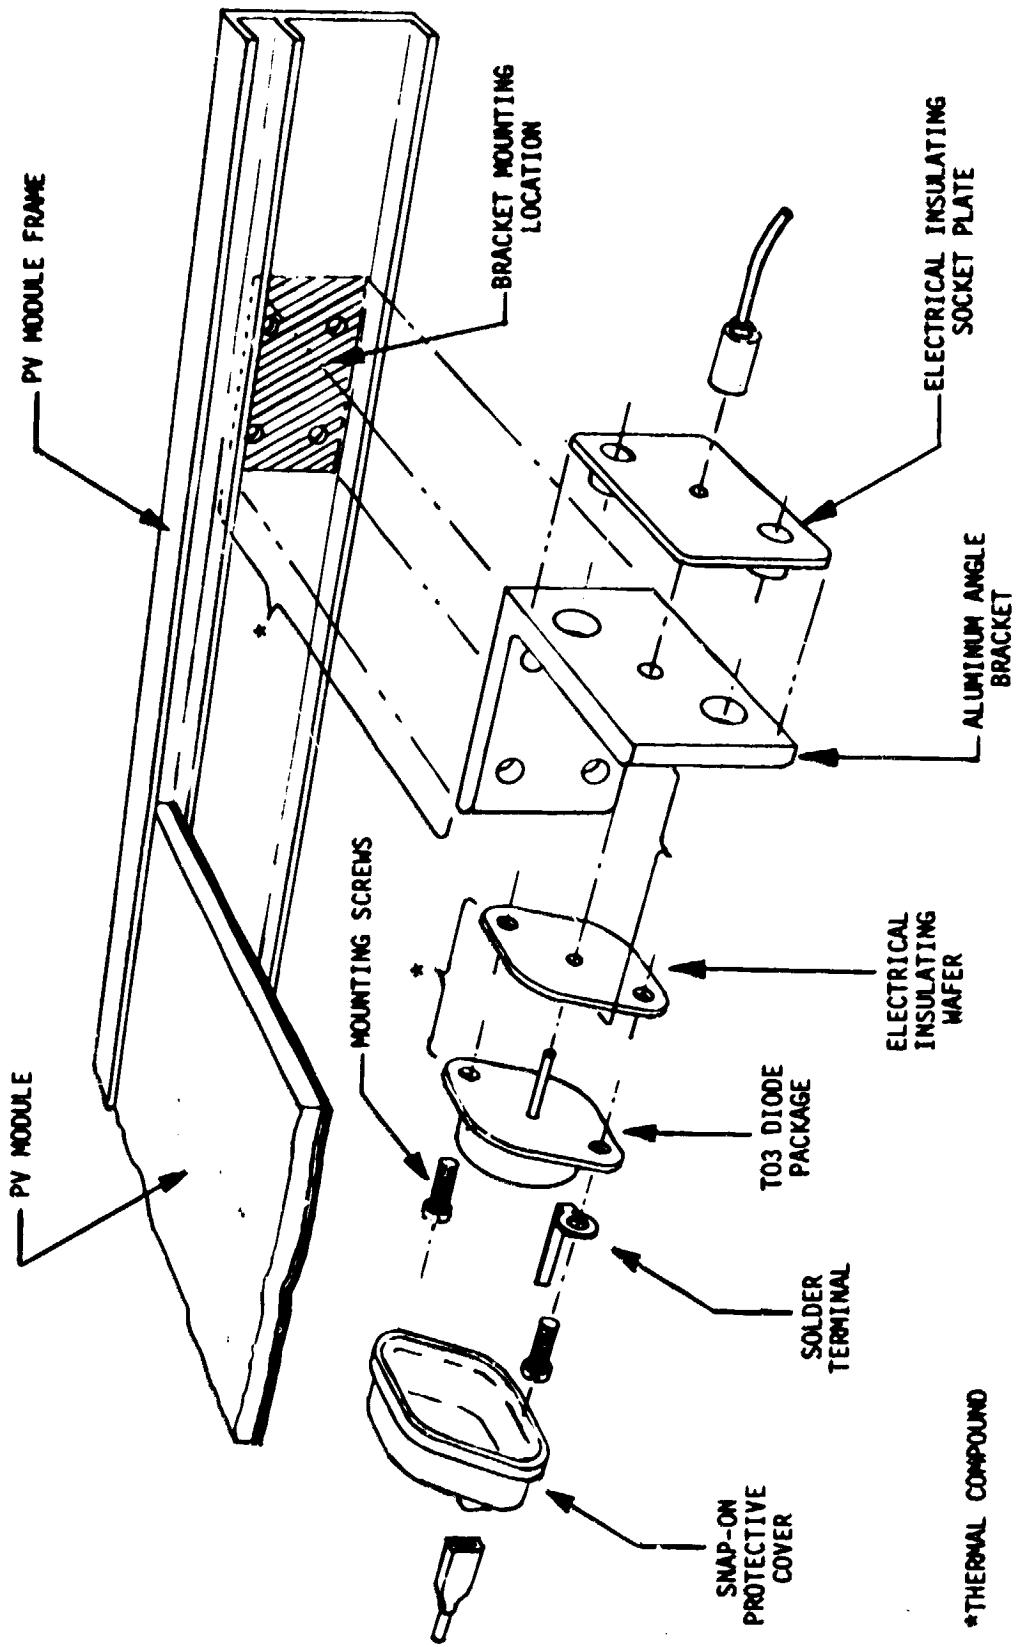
T03 Diode Package Mounted to PV Module Frame
